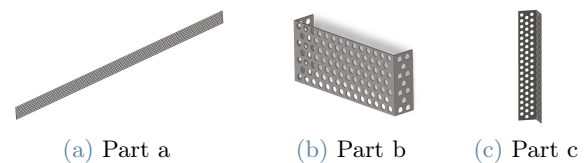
Parts composing the cross holder: part a is the base piece bought from the supplier (1000 mm x 50 mm x 1 mm perforated flat bar) from which part b and part c can be obtained.
